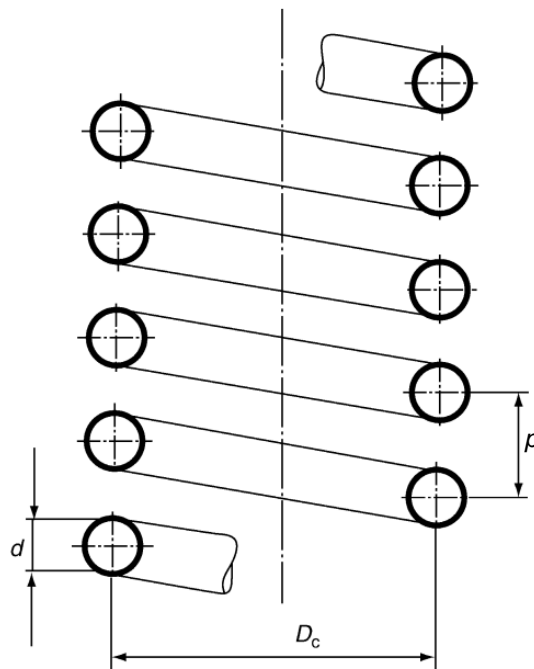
Geometry of a helical coil showing critical dimensions. (Gnielinski, 2010: 710)
